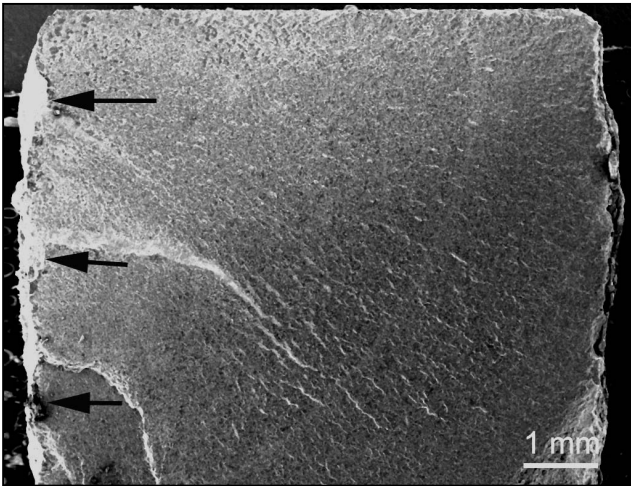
Fatigue fracture surface. Arrows indicate the sites of crack initiation on the corroded surface
